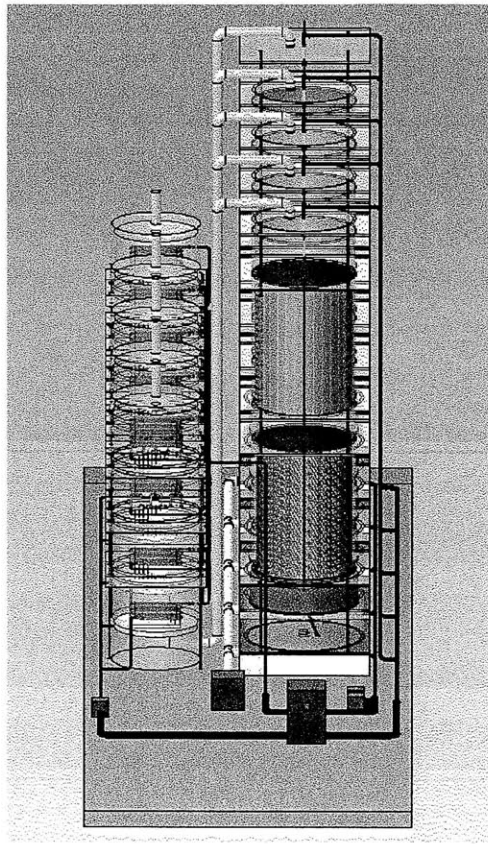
3: Full MDS Solid Model Assembly – Front View
